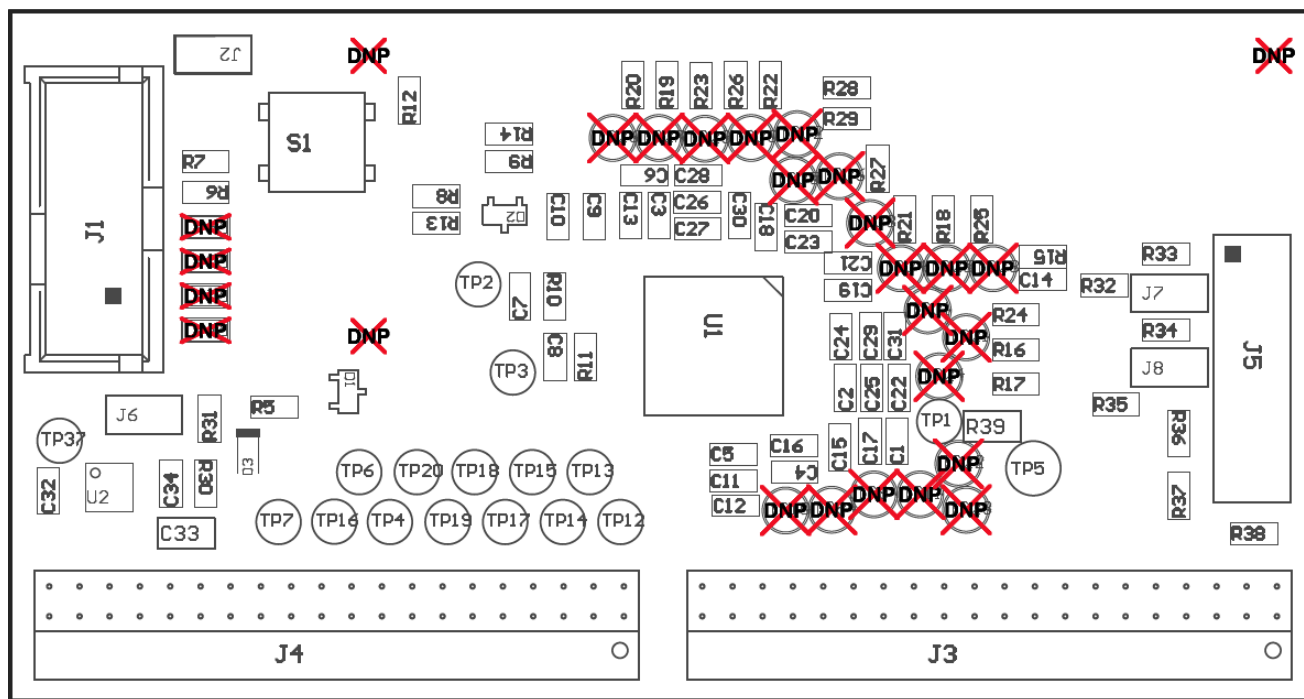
UCD3138064AEVM149 Top Layer Assembly Drawing (Top View)
